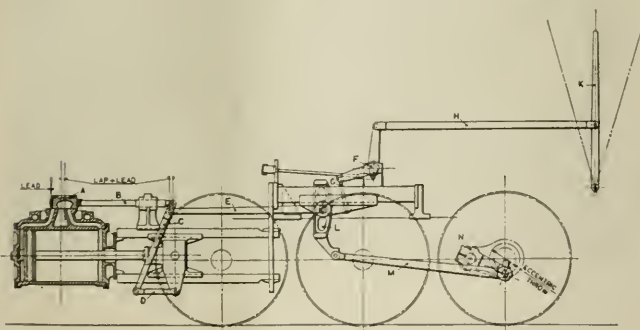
WALSCHAERTS VALVE GEAR ADAPTED FOR OUTSIDE ADMISSION SLIDE VALVES.
